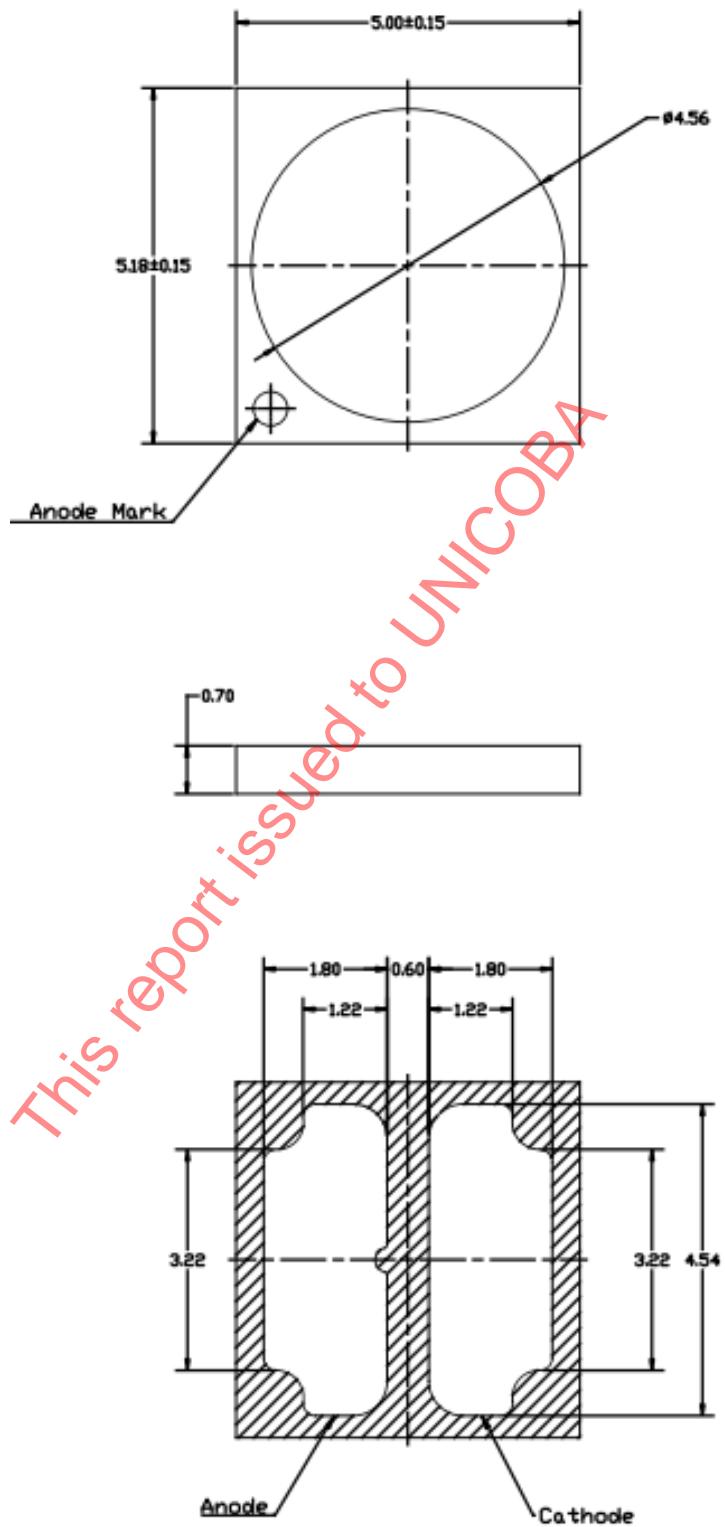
Mechanical drawings for the LUXEON 5050 (all dimensions in millimeters).
